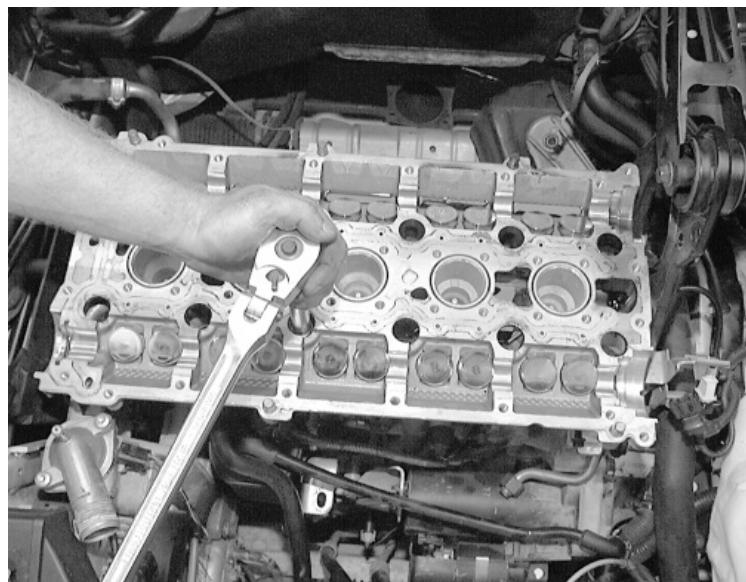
Loosen the cylinder head bolts starting from the inside and working outward
